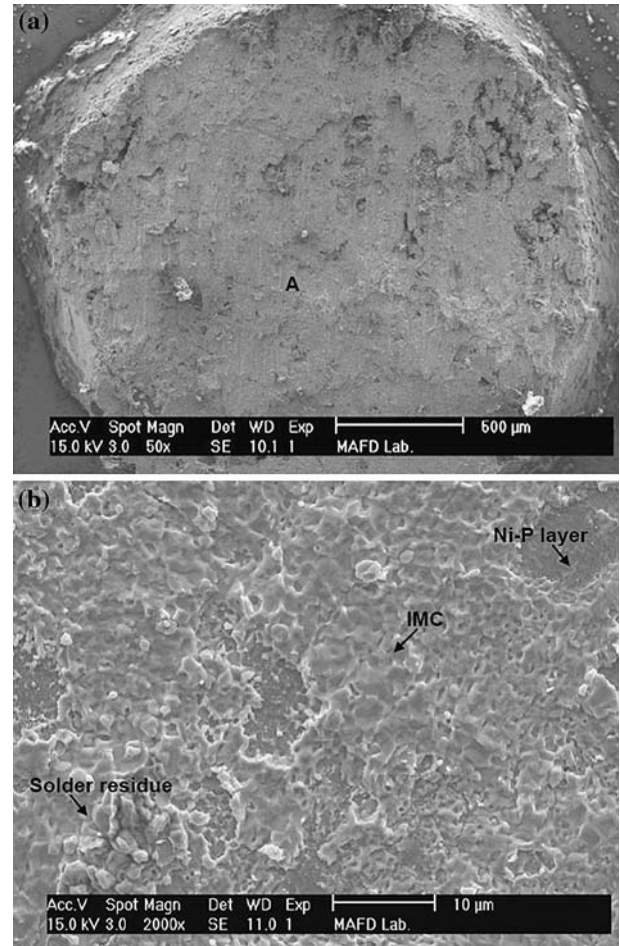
The fracture surface images of Sn-3Ag-10Sb after isothermal storage at 150°C for 625 h: (a) whole fractured solder joint and (b) magnified image of area A.
